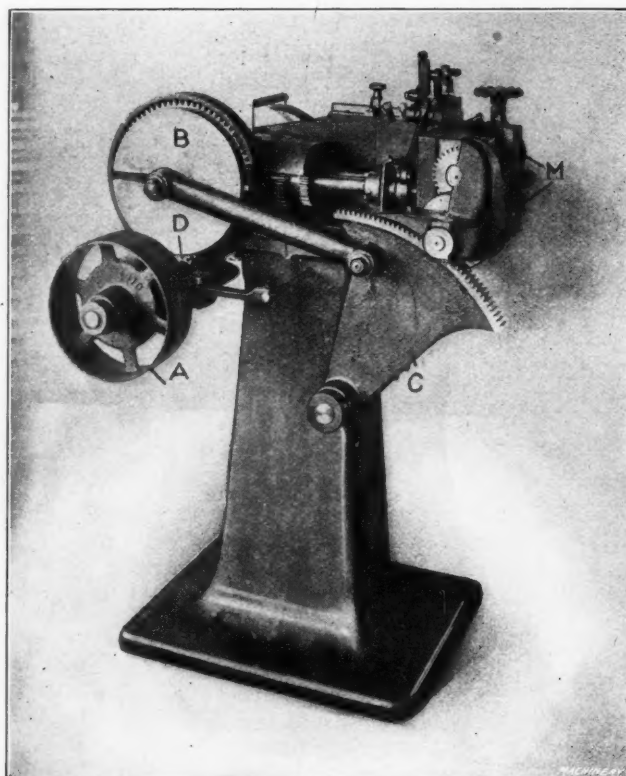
Rear View of One of the Later Types of Spring Coiling Machines built and patented by the Baird Machine Co., Bridgeport, Conn.
